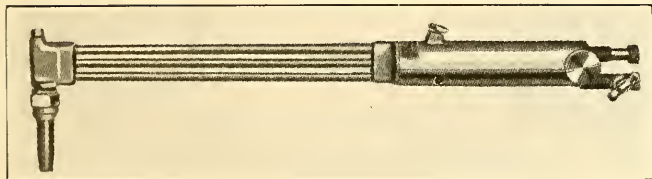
The Oxweld Cutting Torch for Ship Work.
